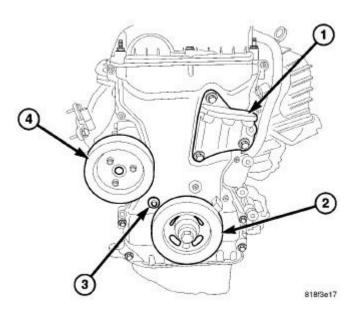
Right Side Engine Mount Bracket, Crankshaft Damper & Water Pump Pulley Courtesy of CHRYSLER GROUP, LLC
